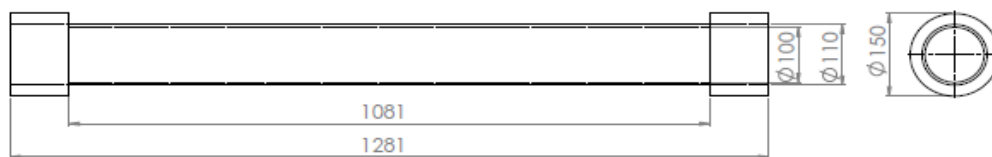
Detail drawing of Boom Cylinder for Tracked Excavator
